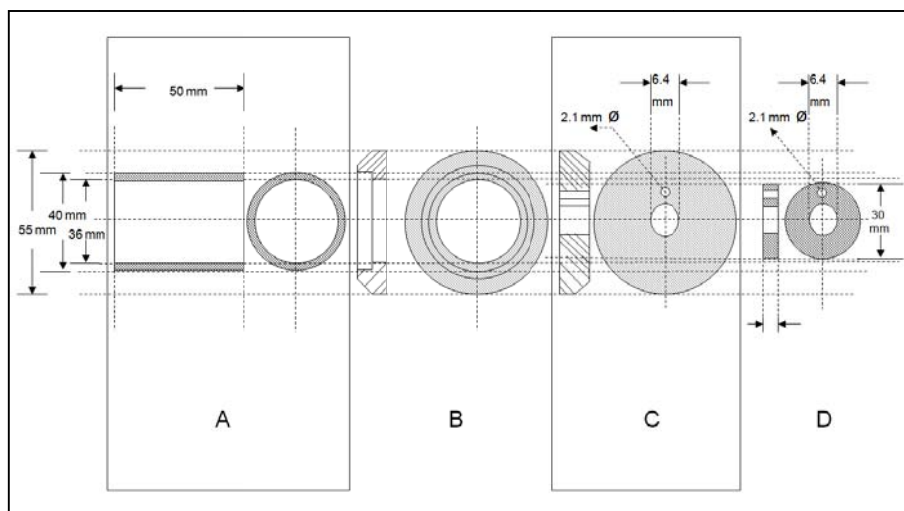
Block diagram of the flange assembly. (A) SS tube (B) flange with bore, (C) and (D) blank flange with 6.4 mm bore for gas inlet and 2.1 mm bore for thermocouple connections, respectively.
